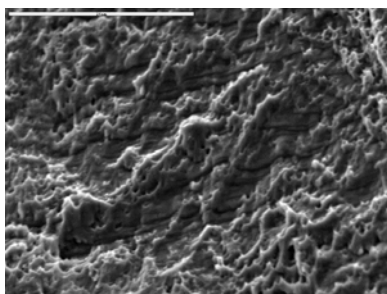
Microstructure of fracture surfaces of Nimonic 263 weld seam after laser shock peening
